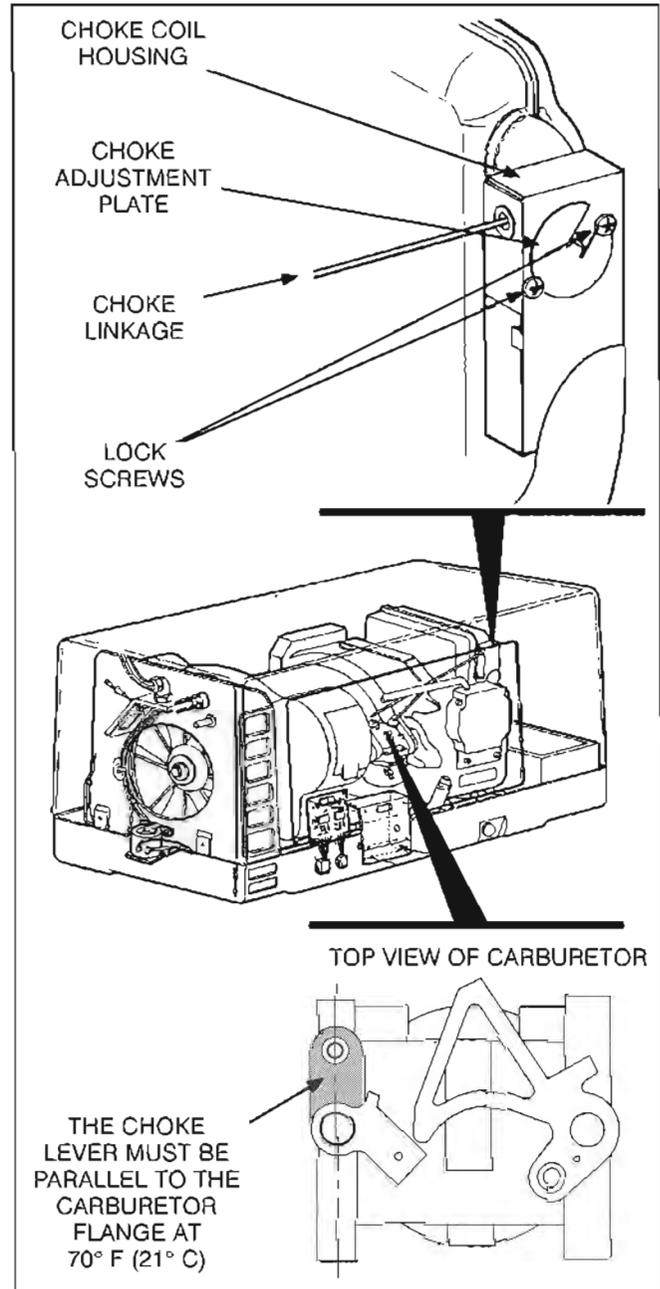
CHOKE ASSEMBLY (TYPICAL ALSO OF MODEL KVC)
